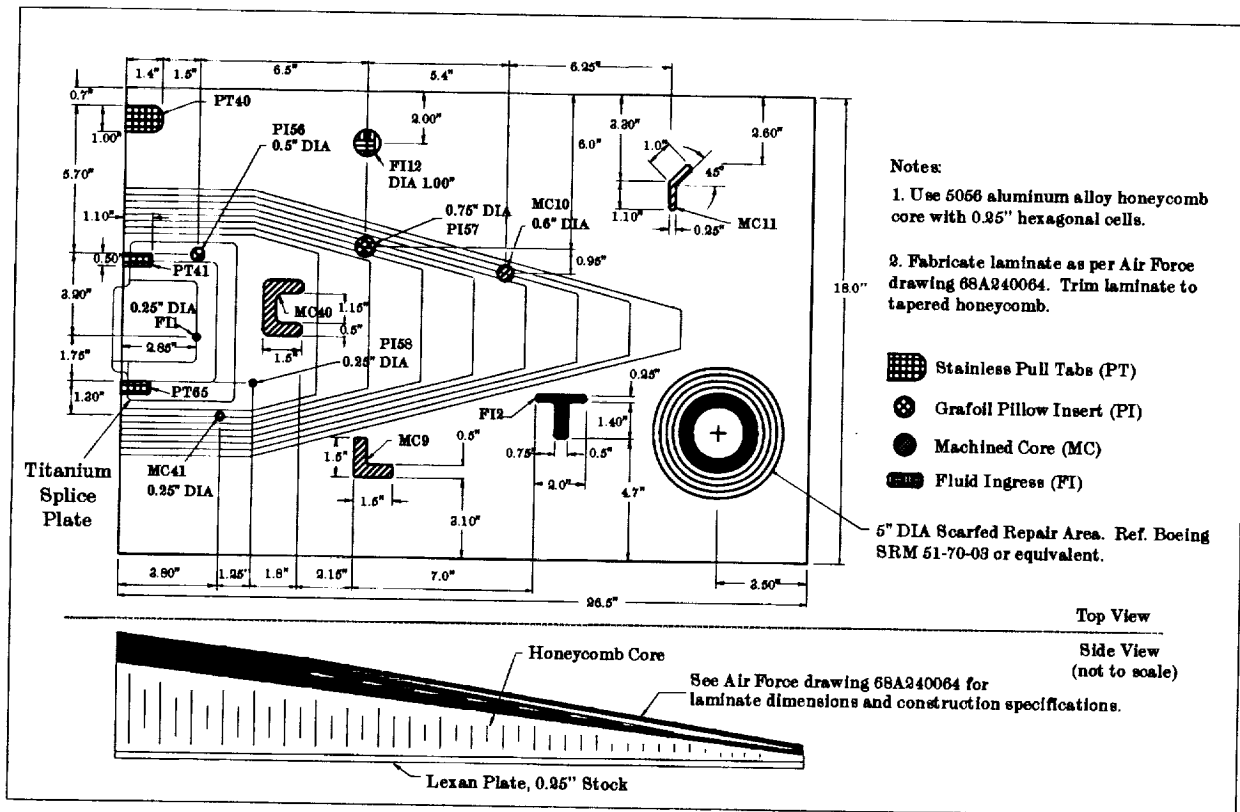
Sample design drawing for an F-15 rudder test specimen.
